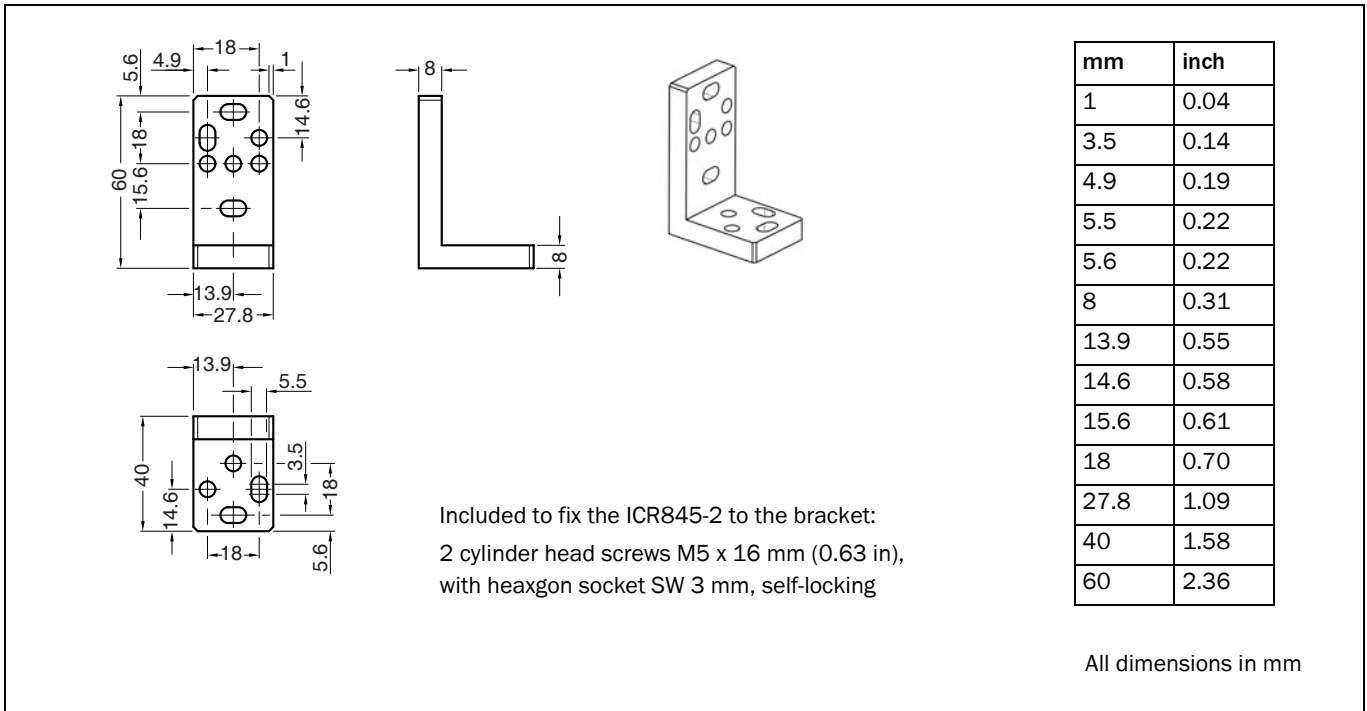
Dimensions of the mounting bracket no. 2025491
